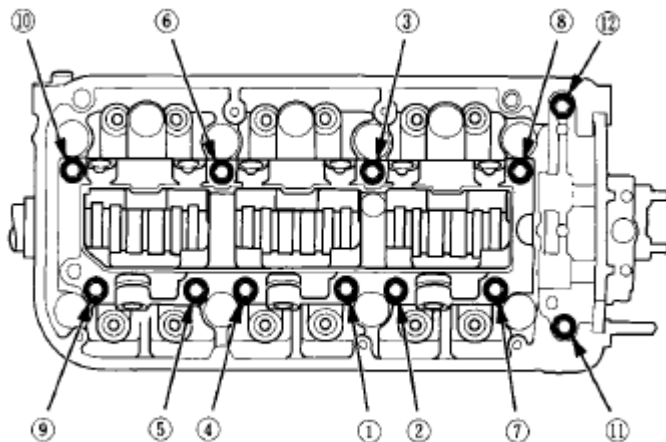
Identifying Rocker Shaft Holder-To-Rear Cylinder Head Bolts With Tightening Sequence
